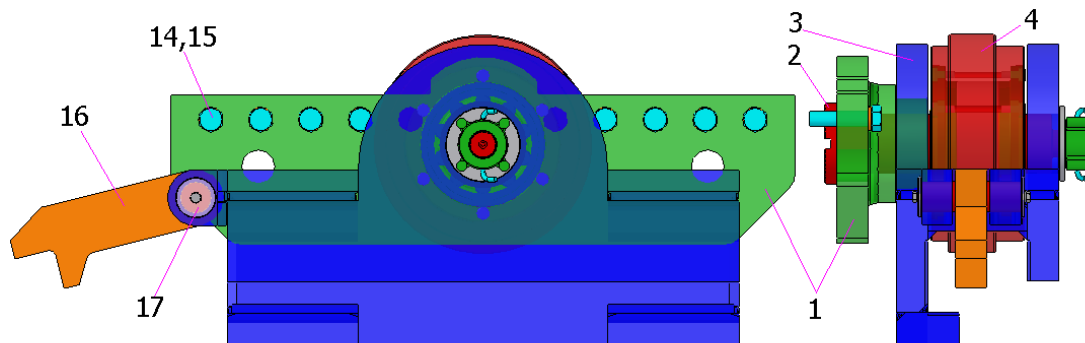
Overall solution for the roller guide mounted on the feed mechanism
